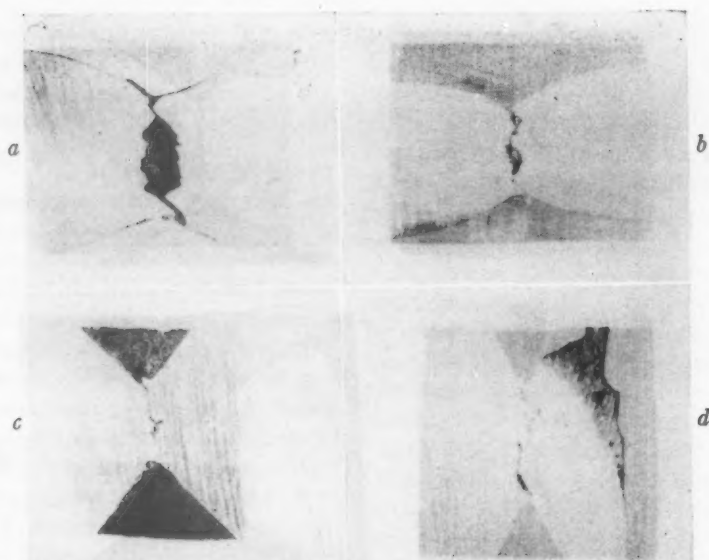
LONGITUDINAL SECTIONS OF FRACTURED COPPER SPECIMENS.
